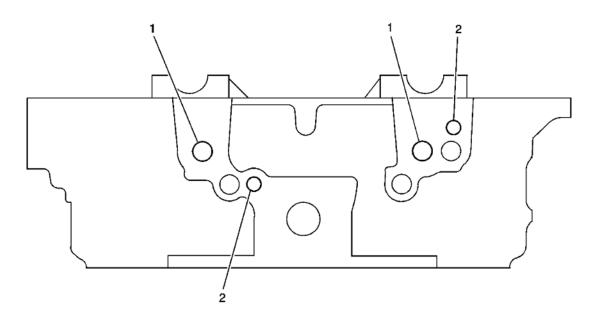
Cylinder Head Thread Repair - End View (Rear) Courtesy of GENERAL MOTORS CORP.
